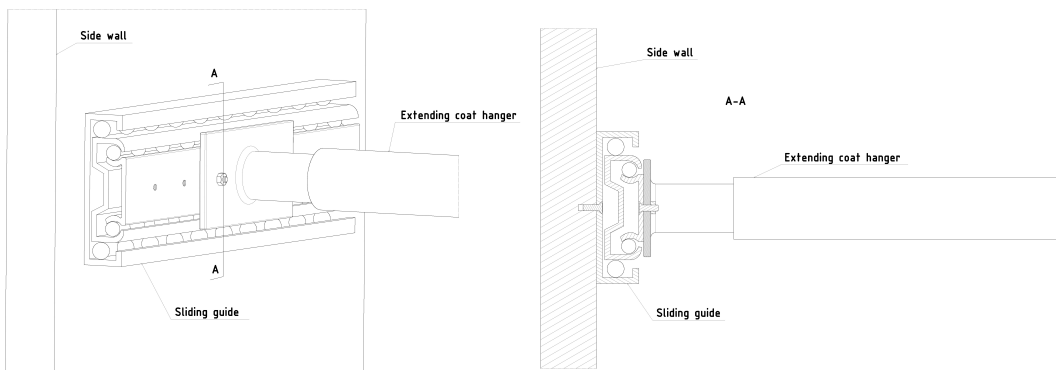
Side wall and coat hanger connection: the same sliding guide used for installation of coat hanger, no requirements to change side wall interfaces. Coat hanger designed as extending rod, to cover a wide range of stowage widths.
